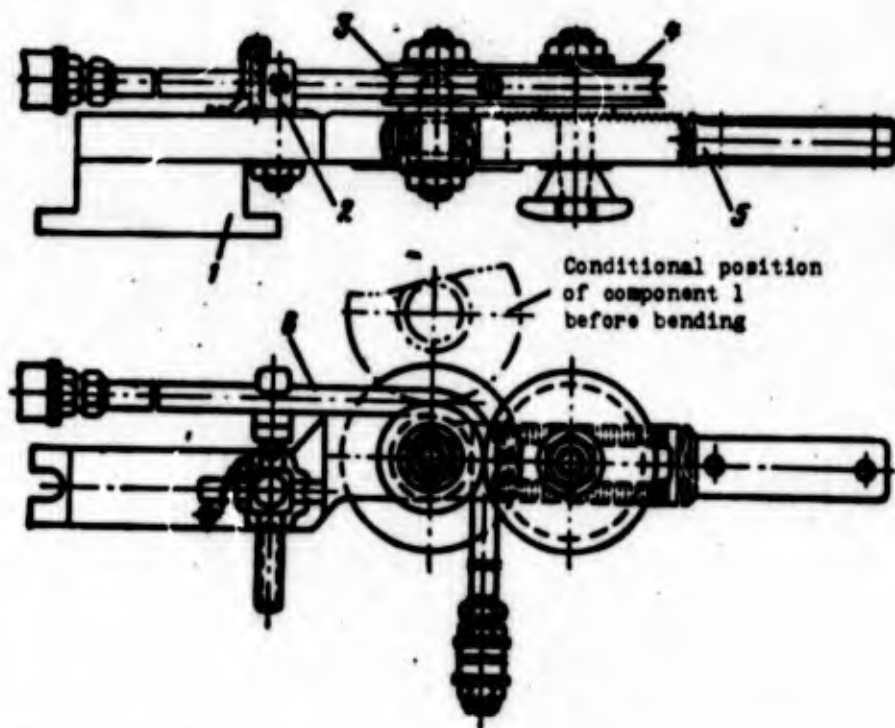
Diagram of device for manual bending of pipes with liquid filling. 1) holder; 2) clamp; 3, 4) bending rollers; 5) handle; 6) pipe.
